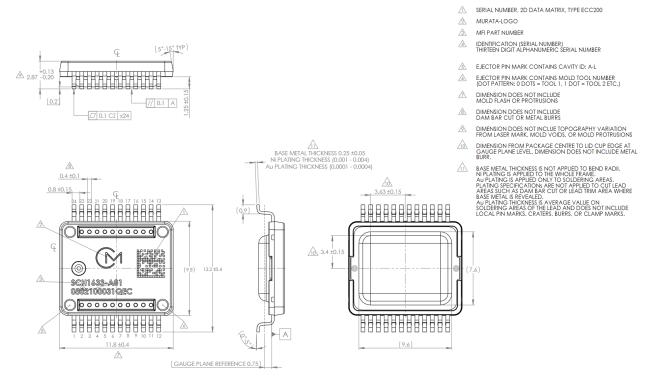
The outline of SCH16T package. All dimensions are in millimeters. All angles are in degrees. Tolerances unless otherwise specified according to ISO2768-f. This figure is preliminary and will be updated later.
